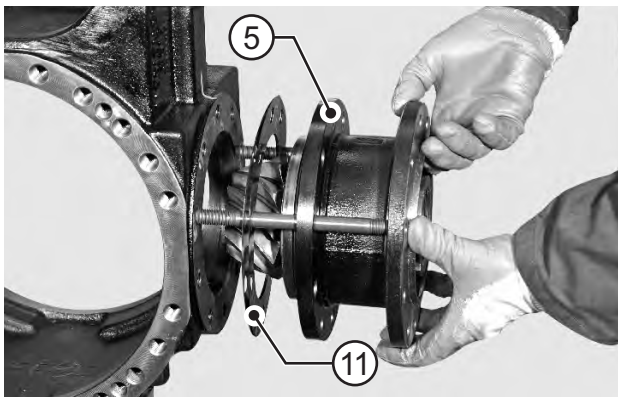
Remove shims (11) and pinion support (5). Refer and keep to the positions marked during disassembly.
